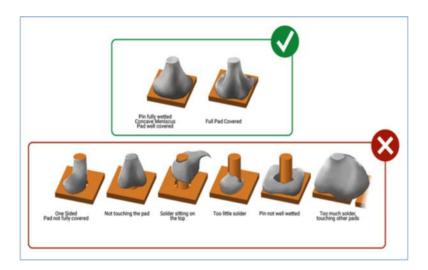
Soldering according to J-STD-001 for Soldering
